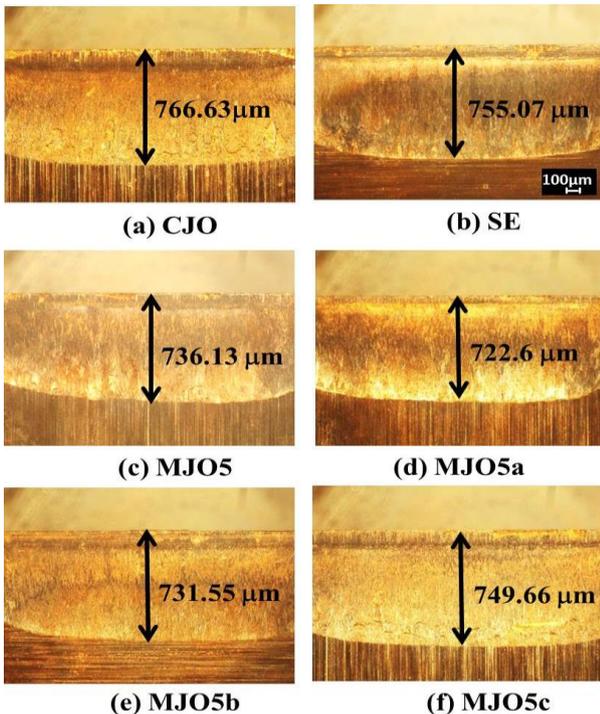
Optical images of tool chip contact length at feed rate, $f_r = 0.12$ mm/rev and cutting speed, $V_c=550$ mm/min
